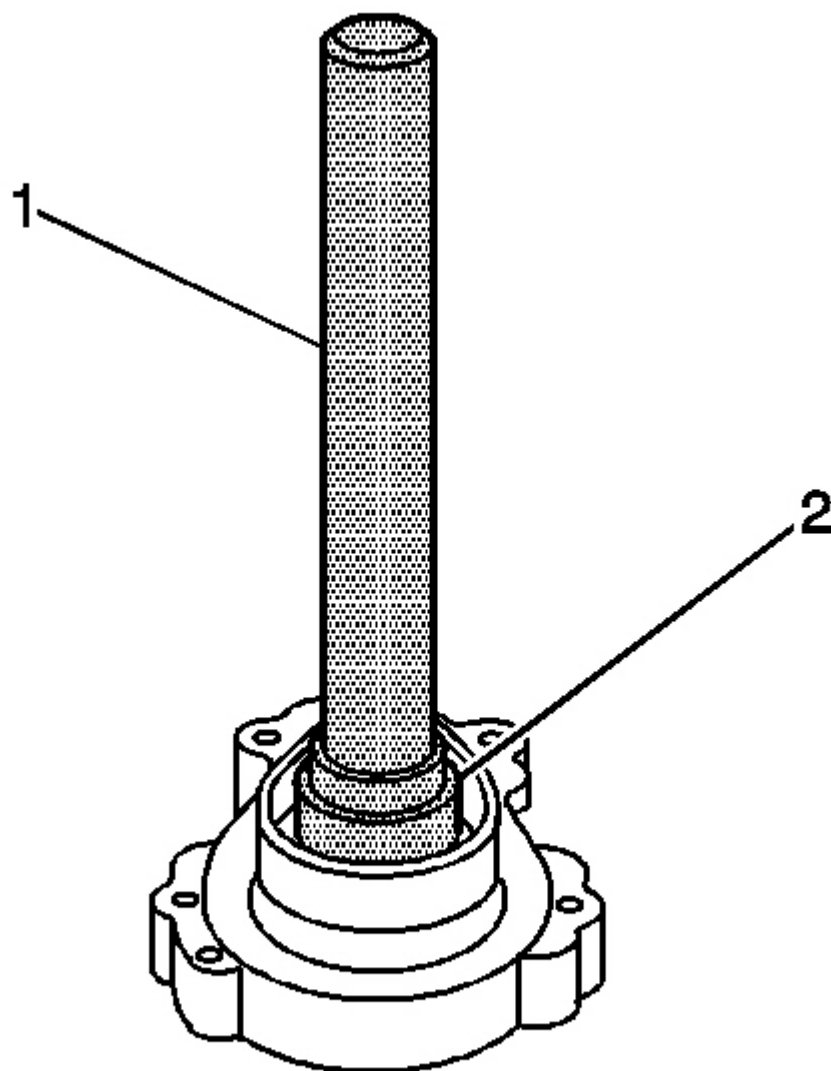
Universal Driver Handle And Differential Bearing Adjuster Needle Bearing Replacer - LH (Inner Case Half)
